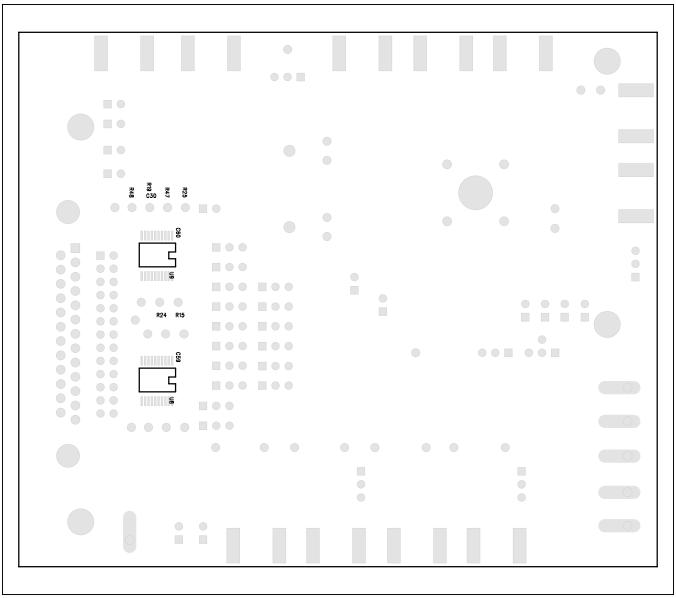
MAX2839AS EV Kit PCB Layout—Bottom Silkscreen
